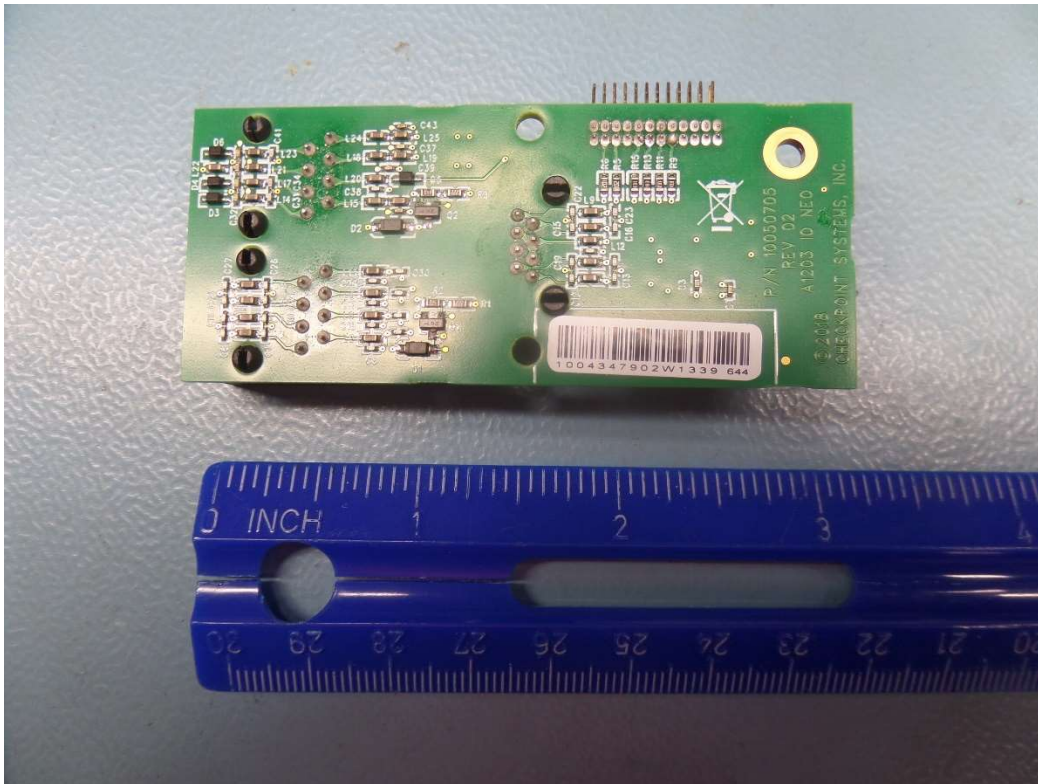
Neo Remote Electronics Enclosure A1203 I/O module bottom side
